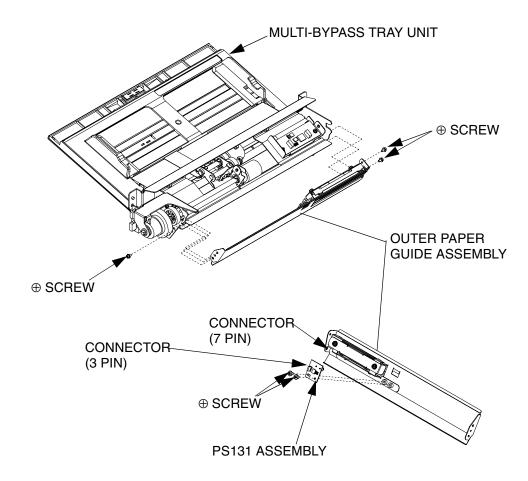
Removal of the Multi Feed Sensor (PS131 Assembly)
